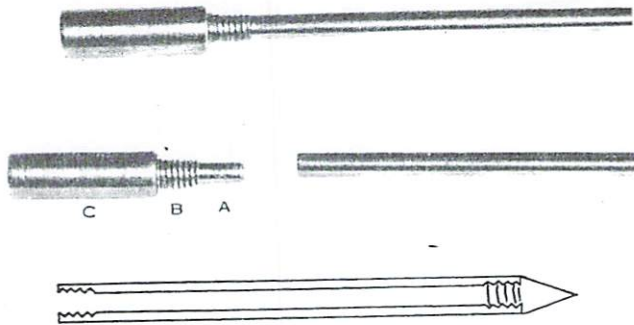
The insert assembly with component parts, the hollow steel needle, the insert and the insert lock.
